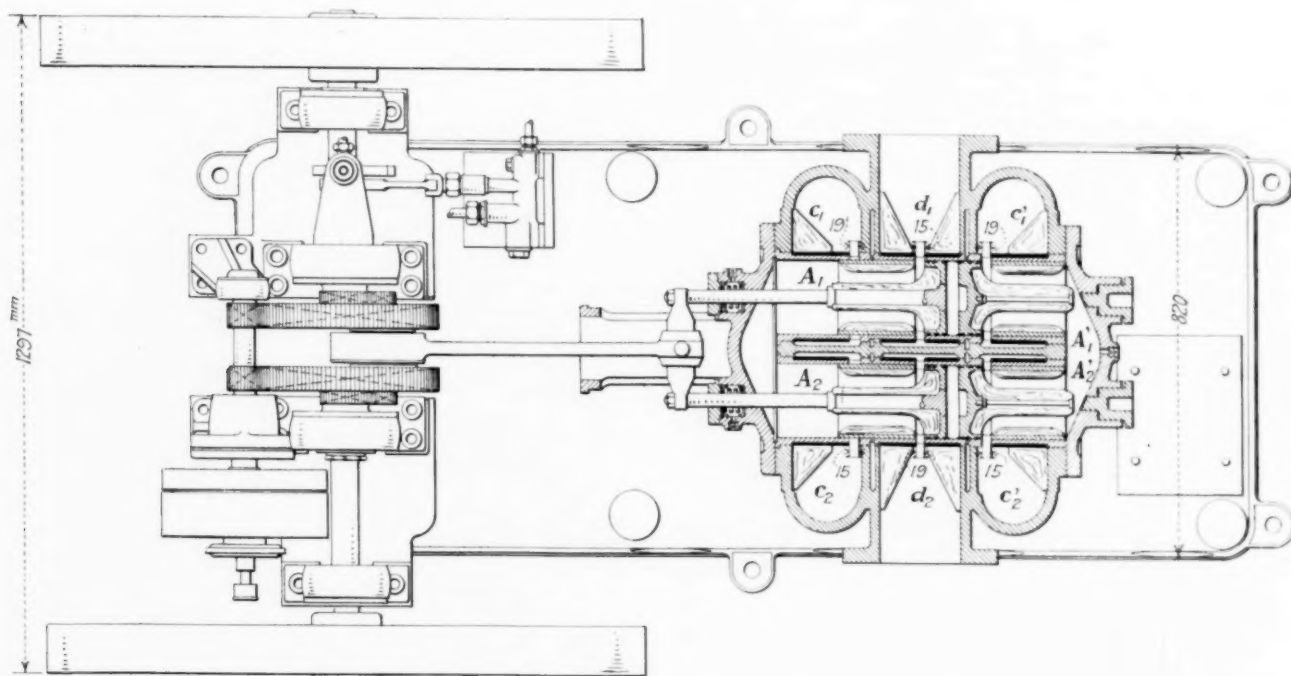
"WATTESS" COMPRESSOR OF THE LEBLANC REFRIGERATING MACHINE
